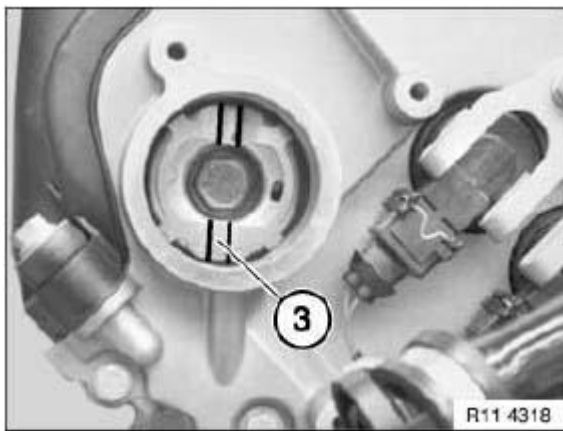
Aligning Vacuum Pump Drive To Groove On Exhaust Camshaft
